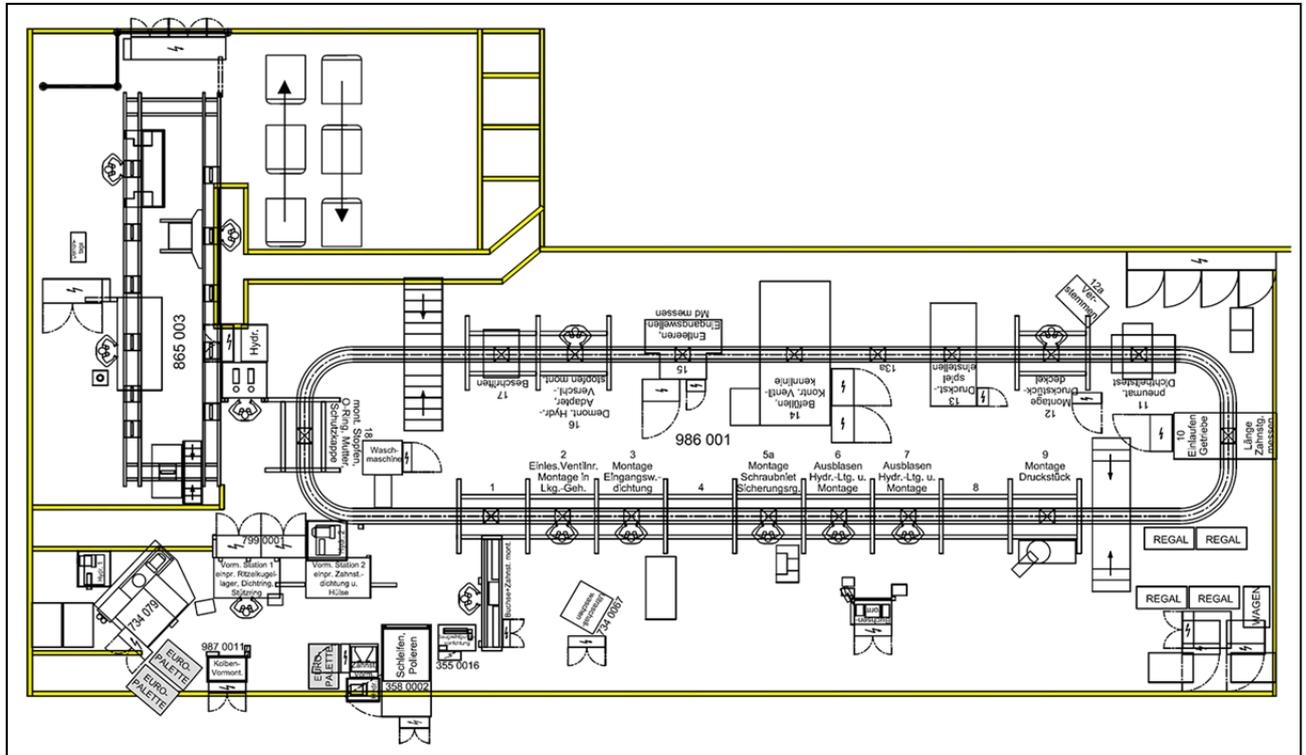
A recent layout of the P1 facility, revised in April 2009.
